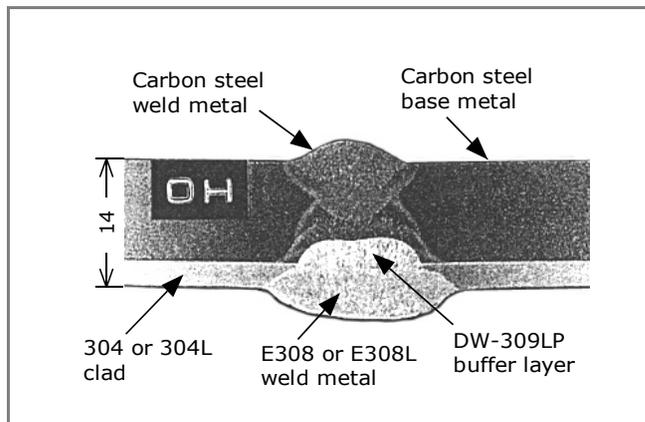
A DW-309LP buffer layer in an overhead joint weld of stainless-clad steel.
